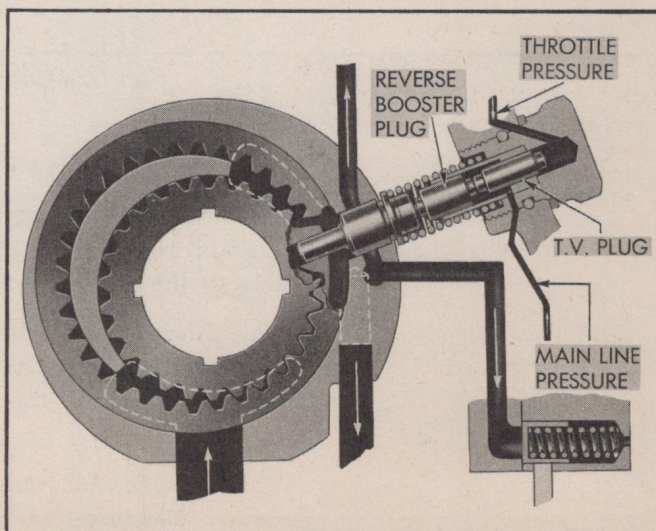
Schematic View of Front Pump and Pressure Regulator (D51 Transmission)
